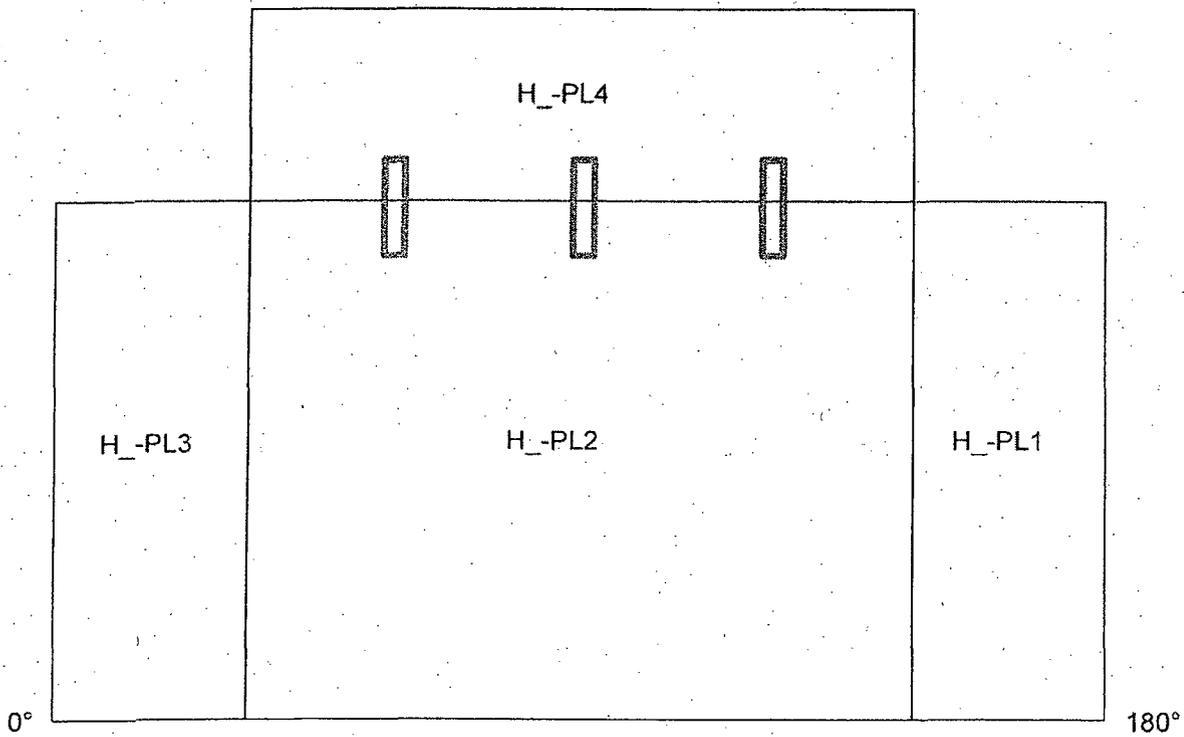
Weld layout for interior of outer banks (Square Hood Dryer)
